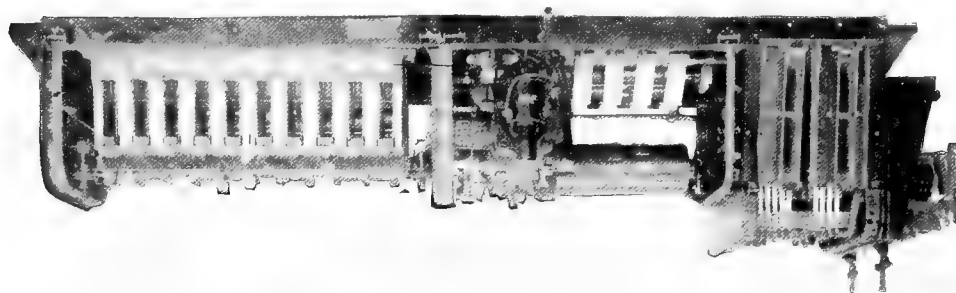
Type PC-2A Motor Controller with Arc Chute Unit Lowered.
